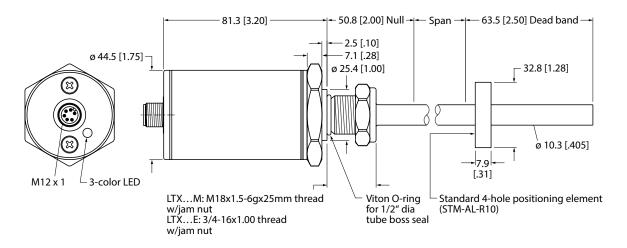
Side view of LTX-R10 with dimensions in mm [in] (design with raised face)
